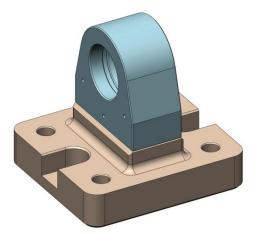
Locker Sleeve Housing bolted onto Locker Sleeve Base.
